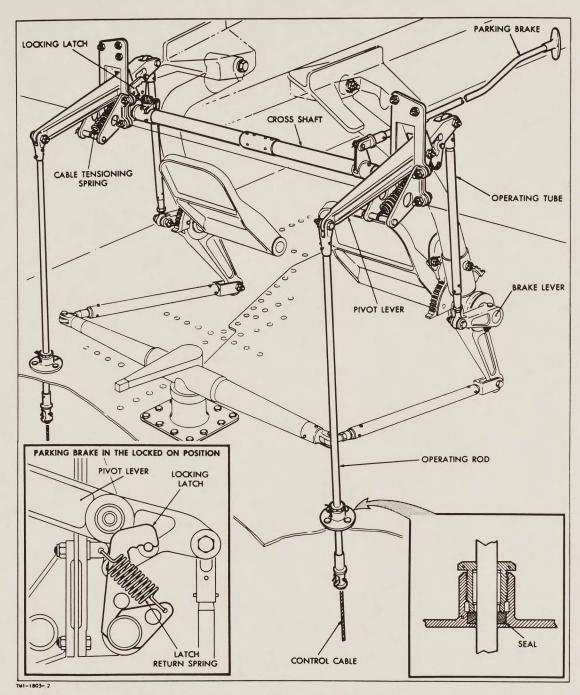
WHEEL BRAKE MECHANICAL CONTROLS
